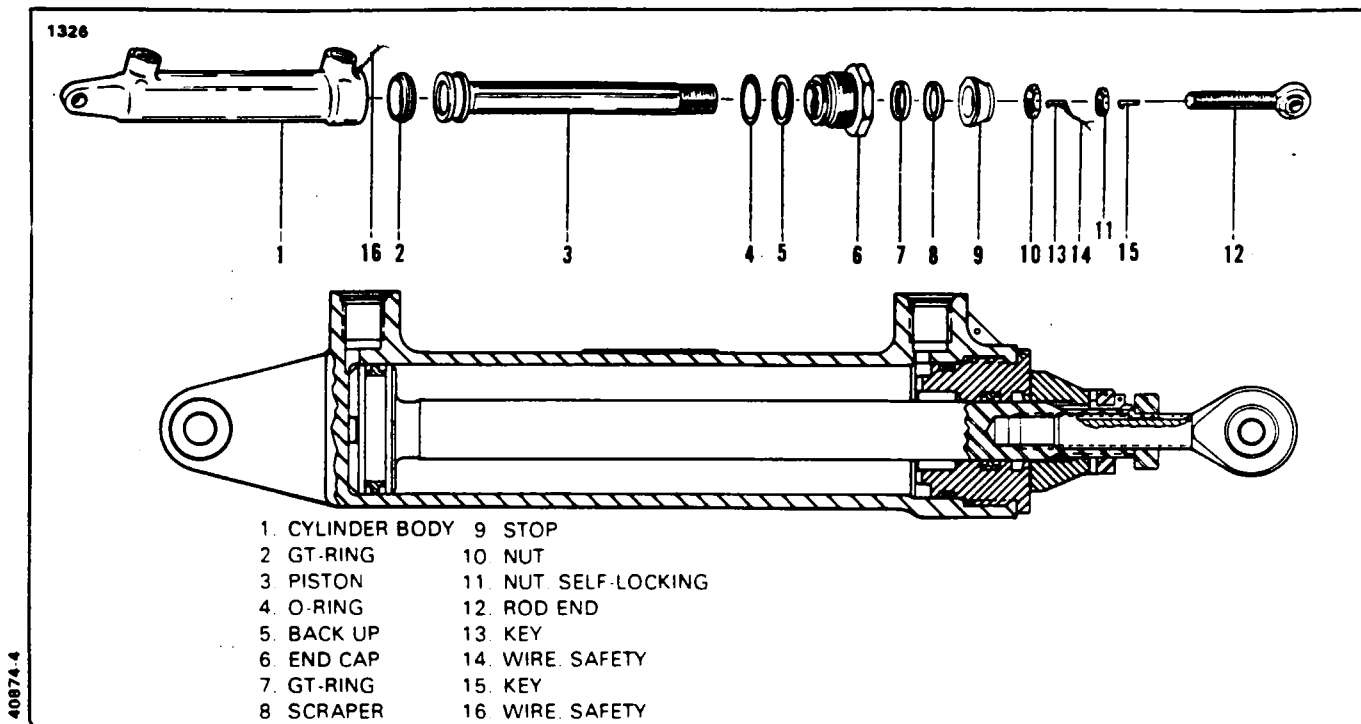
Gear Actuating Cylinder (Wiebel Tool WTC 2115-1)
